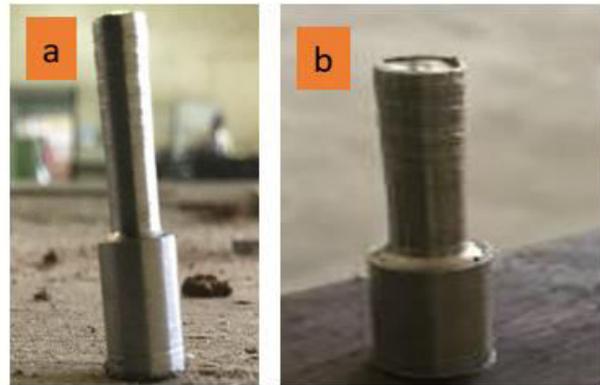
(a) Stainless steel rod (b) Mild steel rod.
